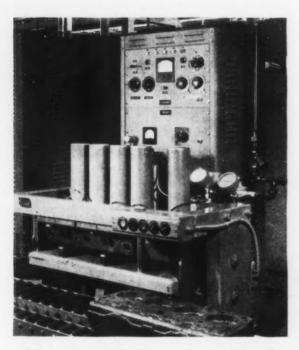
This is the Cavitometer setup for checking the volume of each clearance space in cylinder heads. The machine goes through an automatic cycle in which clearance volume is measured within ±1 cc by pitch devices under electronic controls.
